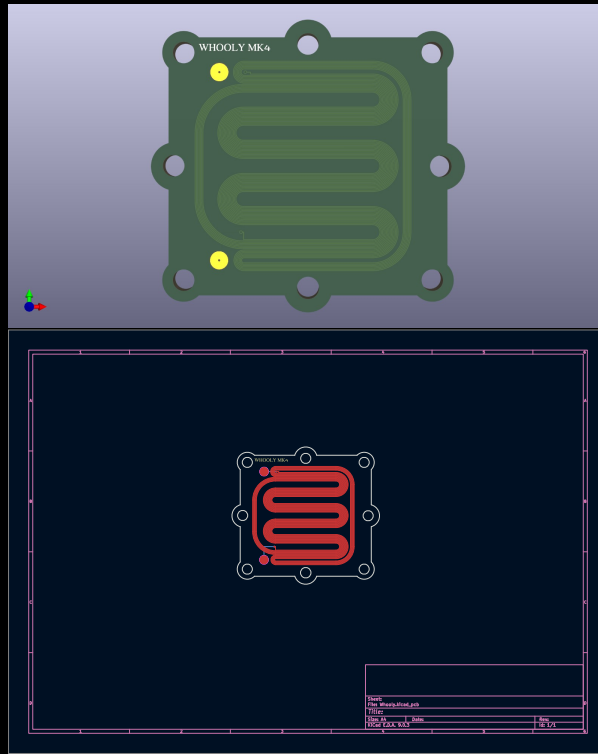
Top: Figure depicting the 3D render of the transducer PCB. Bottom: Transducer design and PCB outline blueprint.
